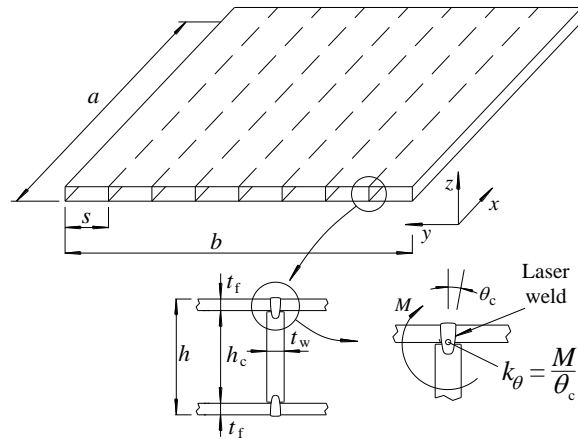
A laser-welded web-core sandwich plate.
